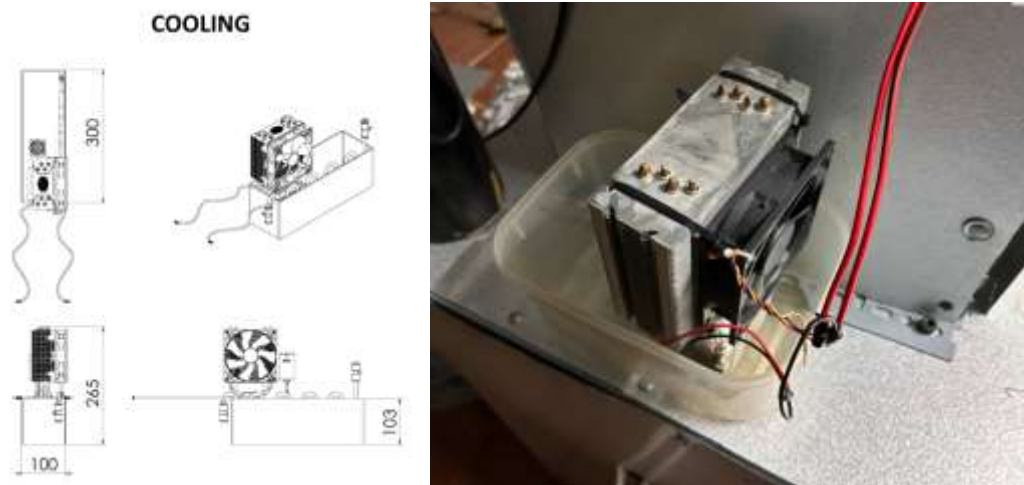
Detail drawing (left) actual assembly (right) of the chiller
